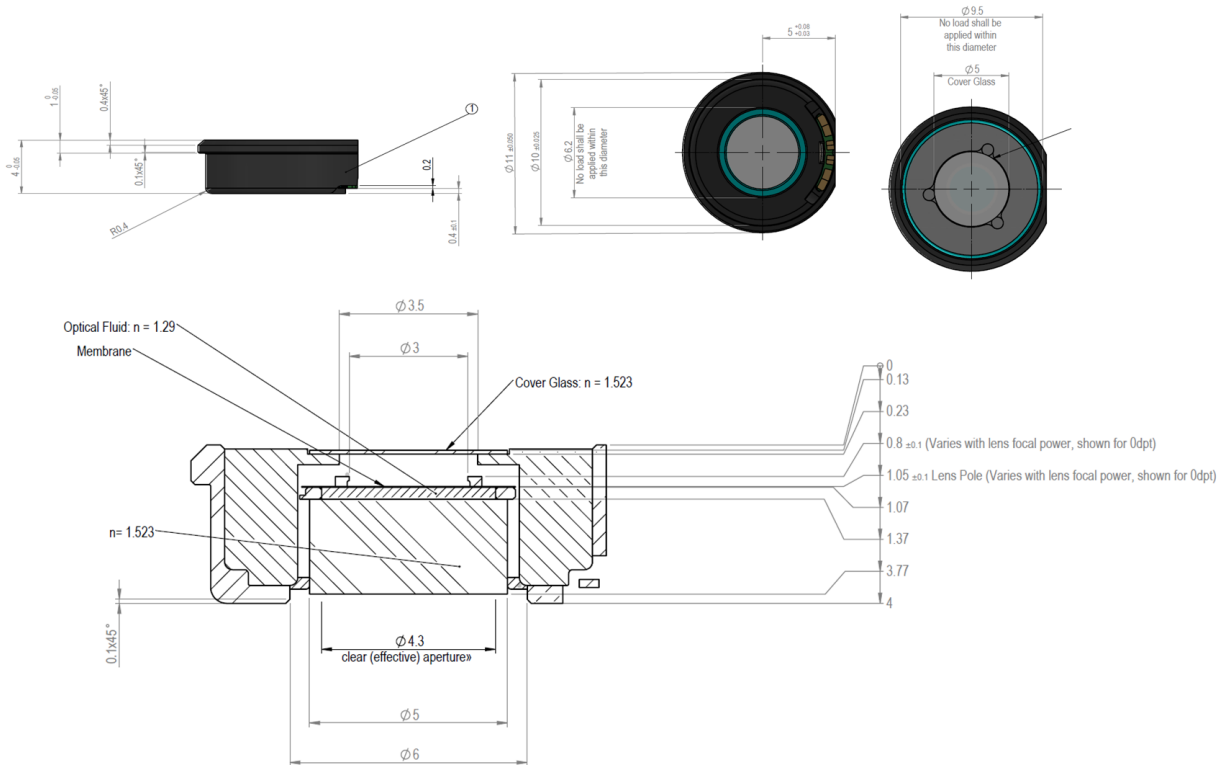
Mechanical drawing of the EL-3-10-XXX-26D-OEM lens
